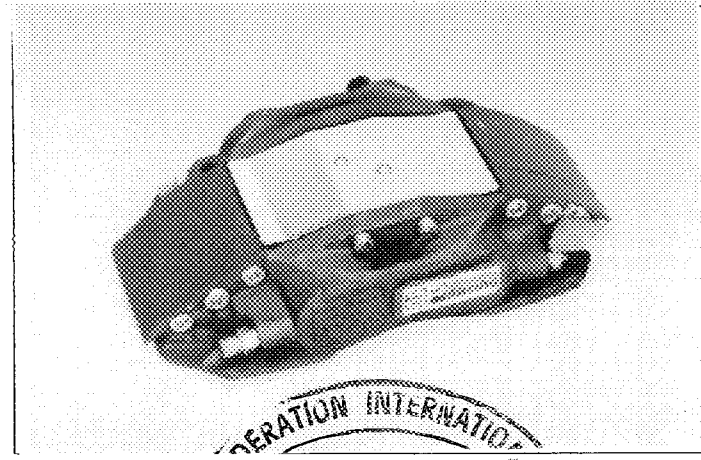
Front and/or Rear brake caliper, TYPE K
